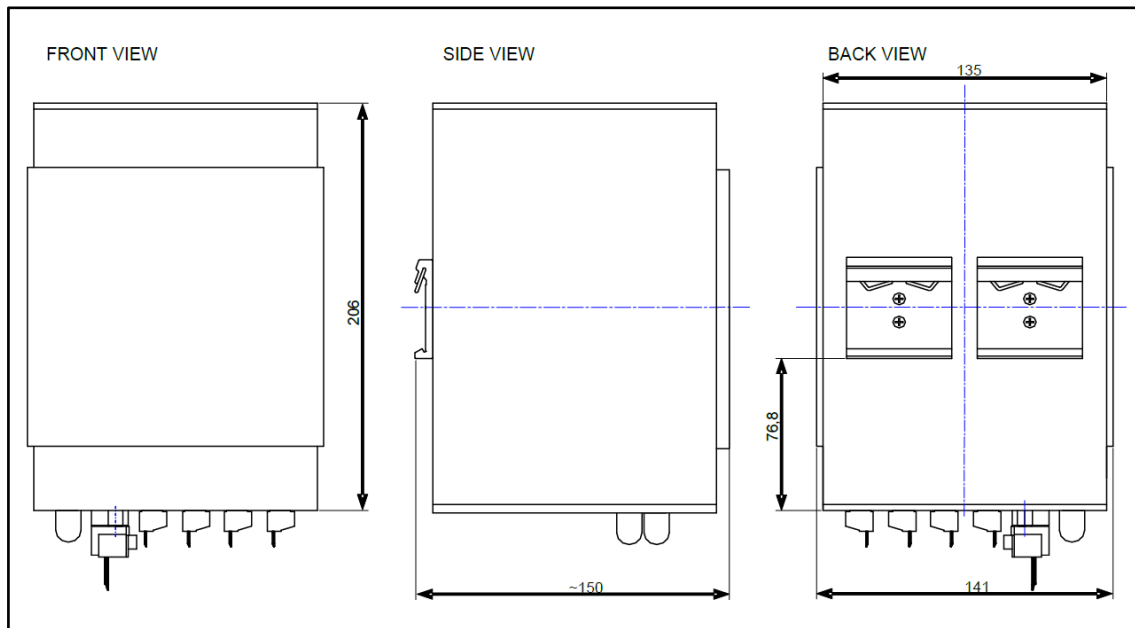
Dimensions for wall mounting 42 HP single rack devices.
